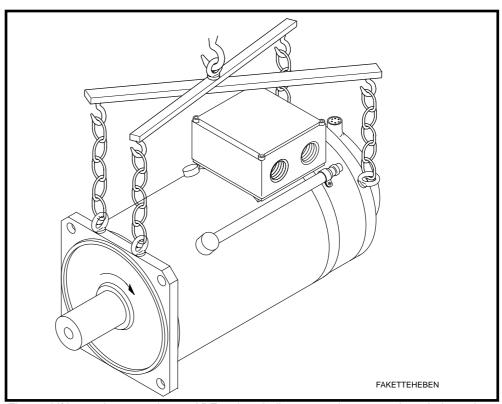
Lifting and transporting an ADF main spindle motor using appropriate chain equipment
